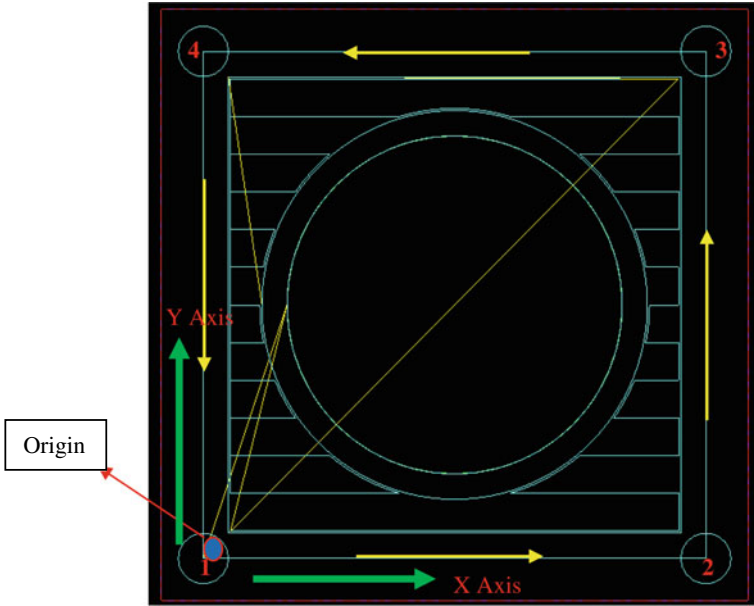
Toolpart strategy for the zigzag cutting method—rectangular part
